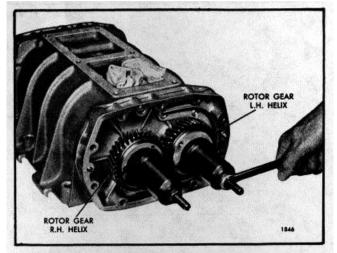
Installing Rotor Gears on Rotor Shafts for Preliminary Check of Clearances using Tool J 6270-6, 7 and 8.
